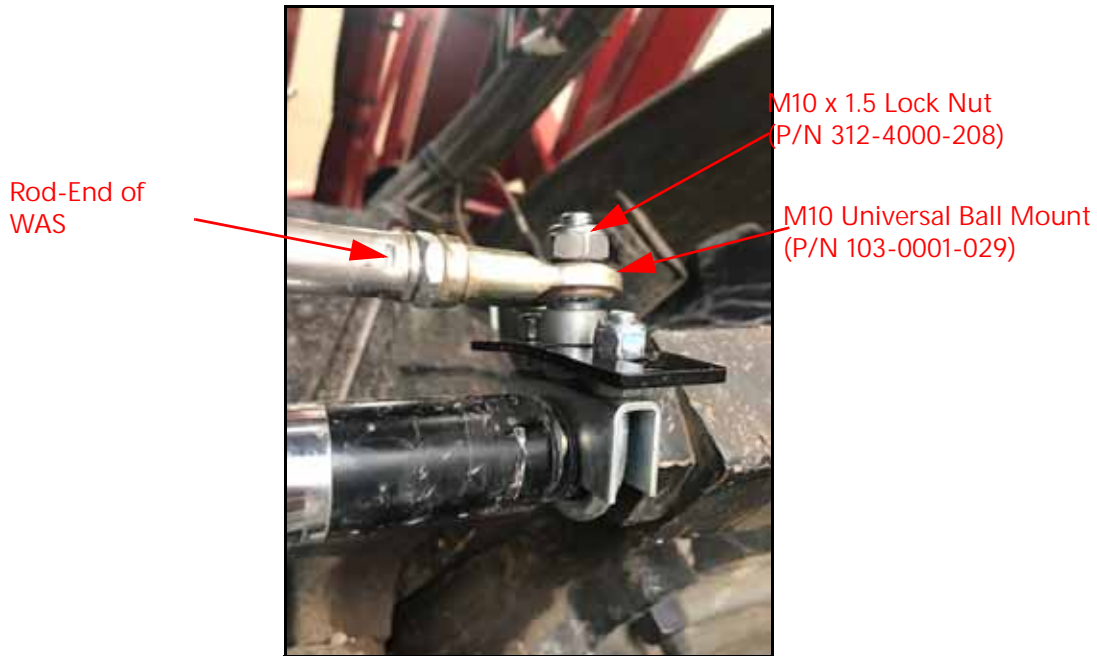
Small WAS Mounting Bracket Installed on Rod-End of Steering Cylinder
